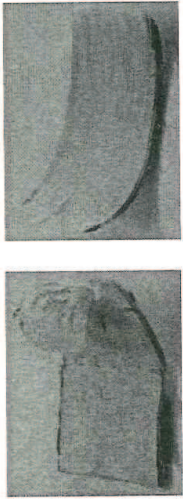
TYPE I (left) and TYPE II (right) for branch machining
